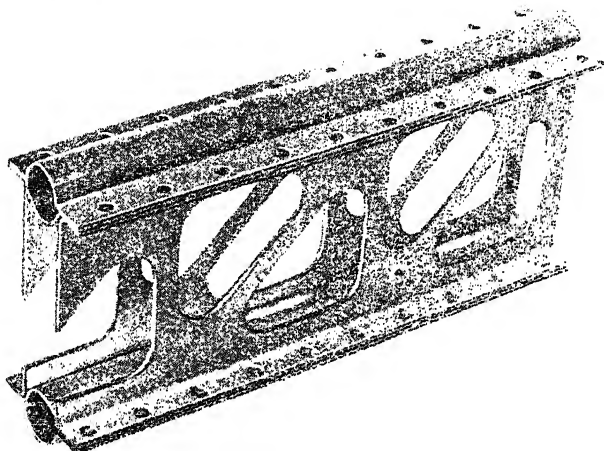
DURALUMIN SPAR WELDED BY THE SCIACKY METHOD
